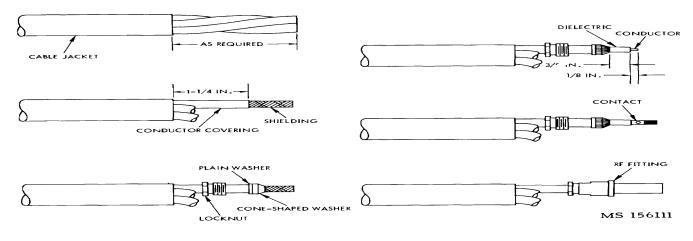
Terminating a coaxial cable, using an rf connector and fitting.
